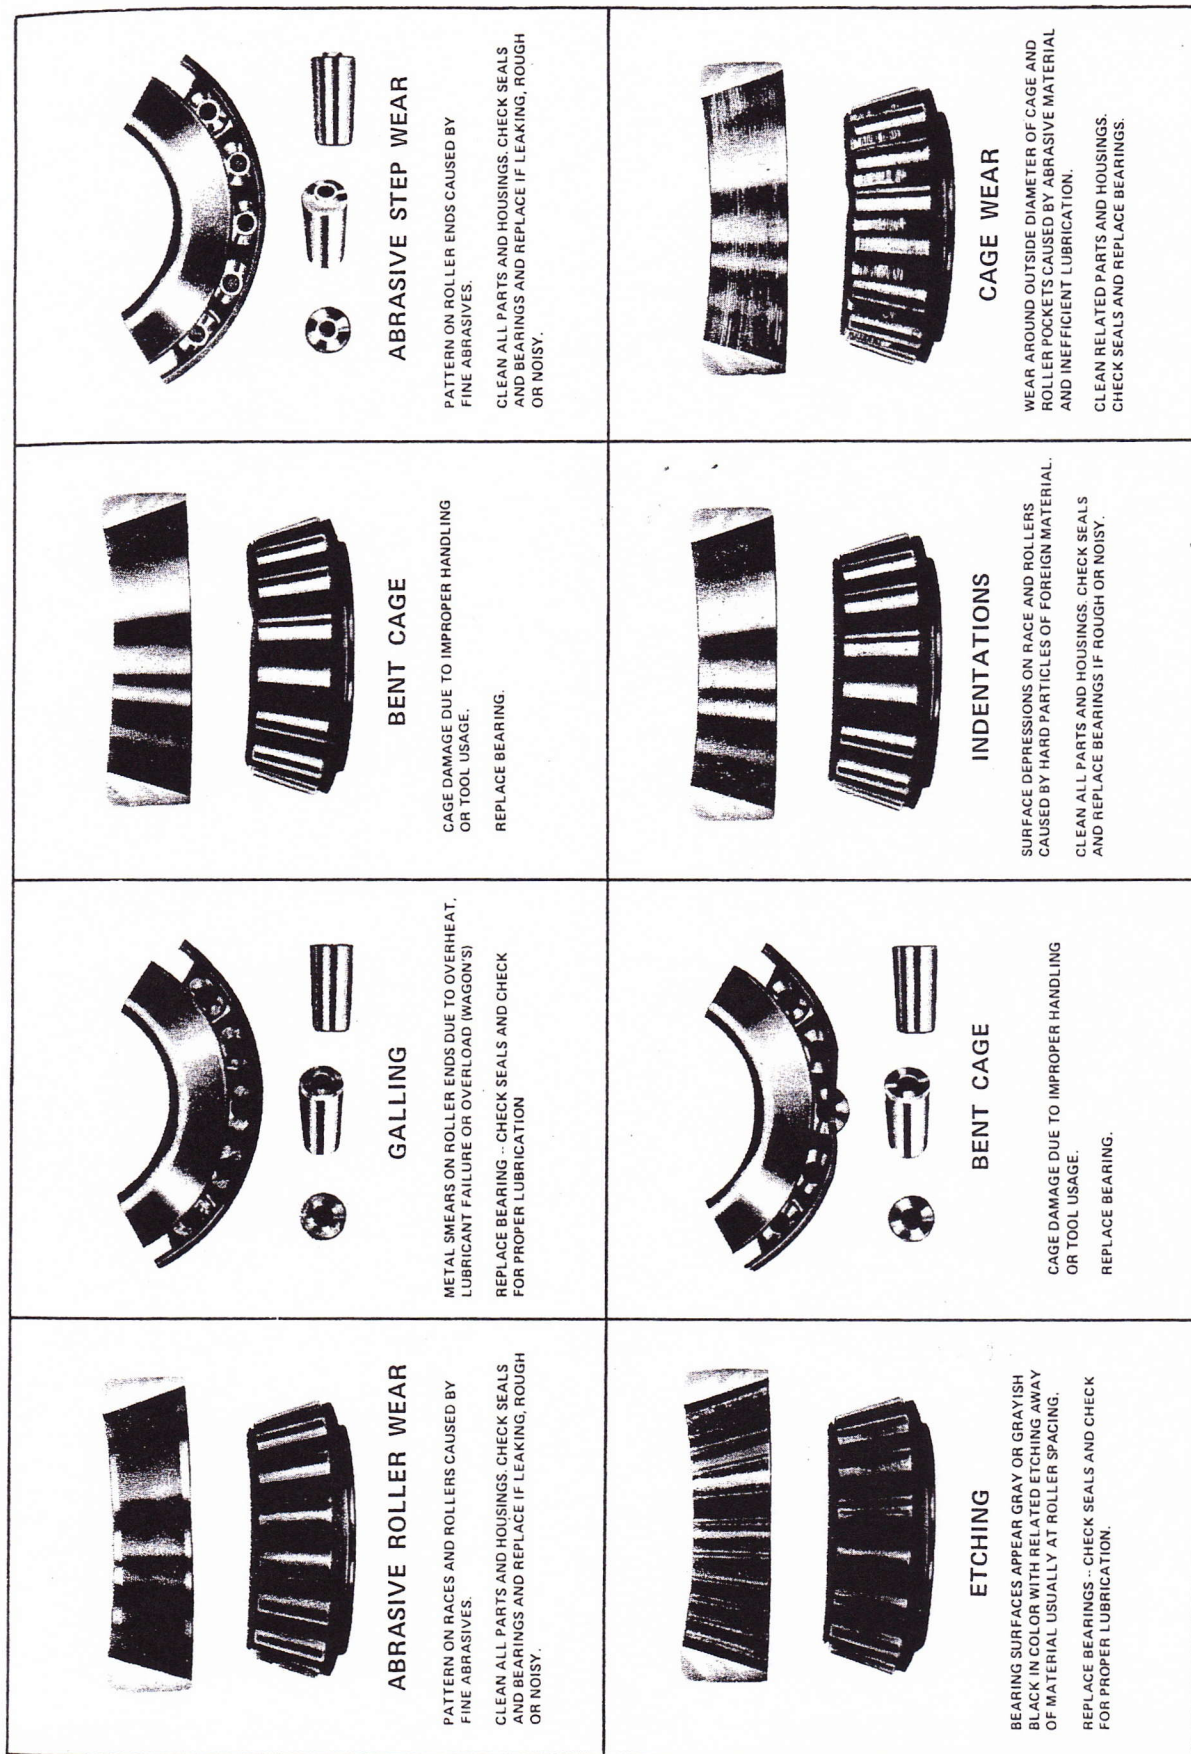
Types of Wheel Bearing Wear. (Courtesy of General Motors of Canada, Ltd.)
